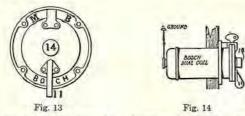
Front view of switch (M), magneto side; (B), battery side.
